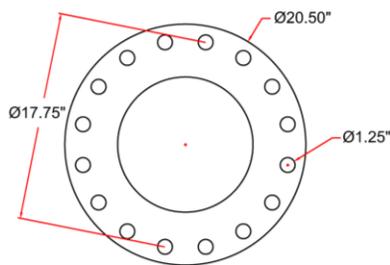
Flange connections at FM Global's explosion vessels used to mount explosion suppressors and detectors.
